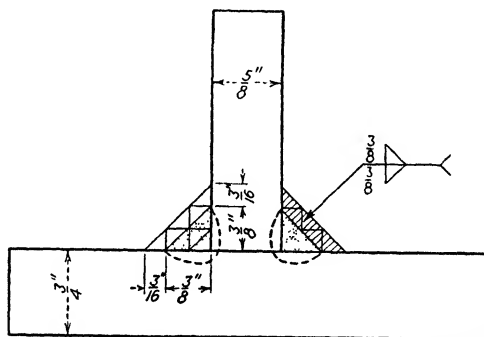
Control of weld size is important. To underweld results in failure, but to overweld is expensive. Here the weld is made only half again as large as specified according to dimensions, but it contains over twice the amount of weld metal specified.
